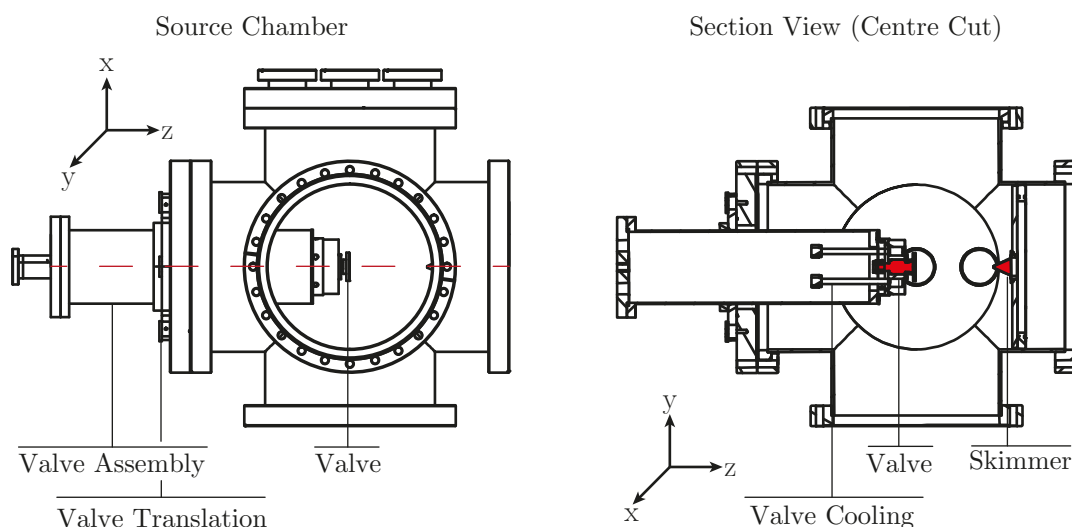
Left: A detailed view of the source chamber. Right: A section view through the centre which reveals the skimmer assembly.
